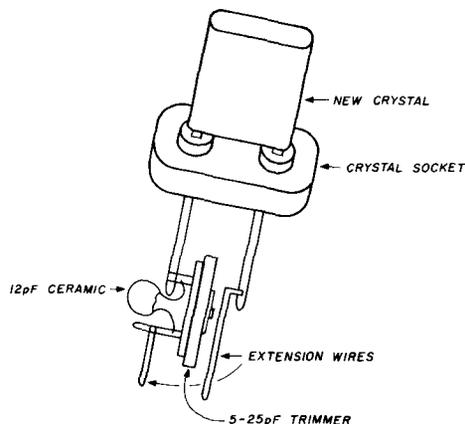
Construction of the crystal paddler, which plugs into the R-4B receiver crystal socket.
